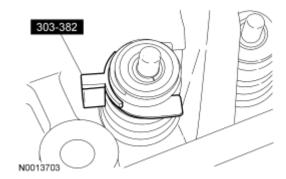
Installing Special Tool Between Valve Spring Coils Courtesy of FORD MOTOR CO.
